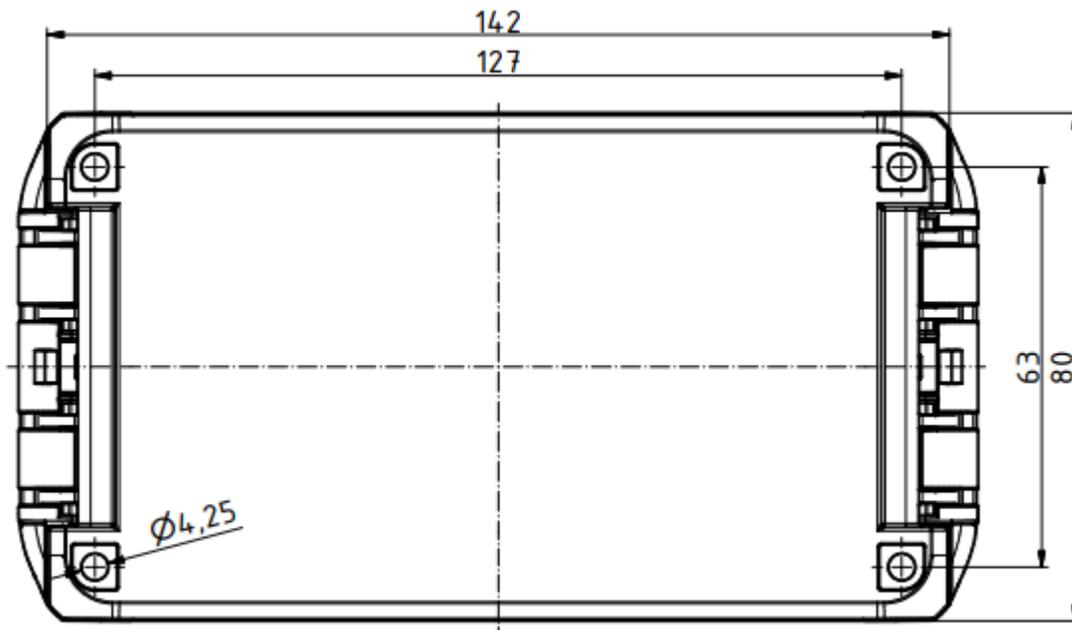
WATERTIGHT ENCLOSURE MOUNTING DIMENSIONS
